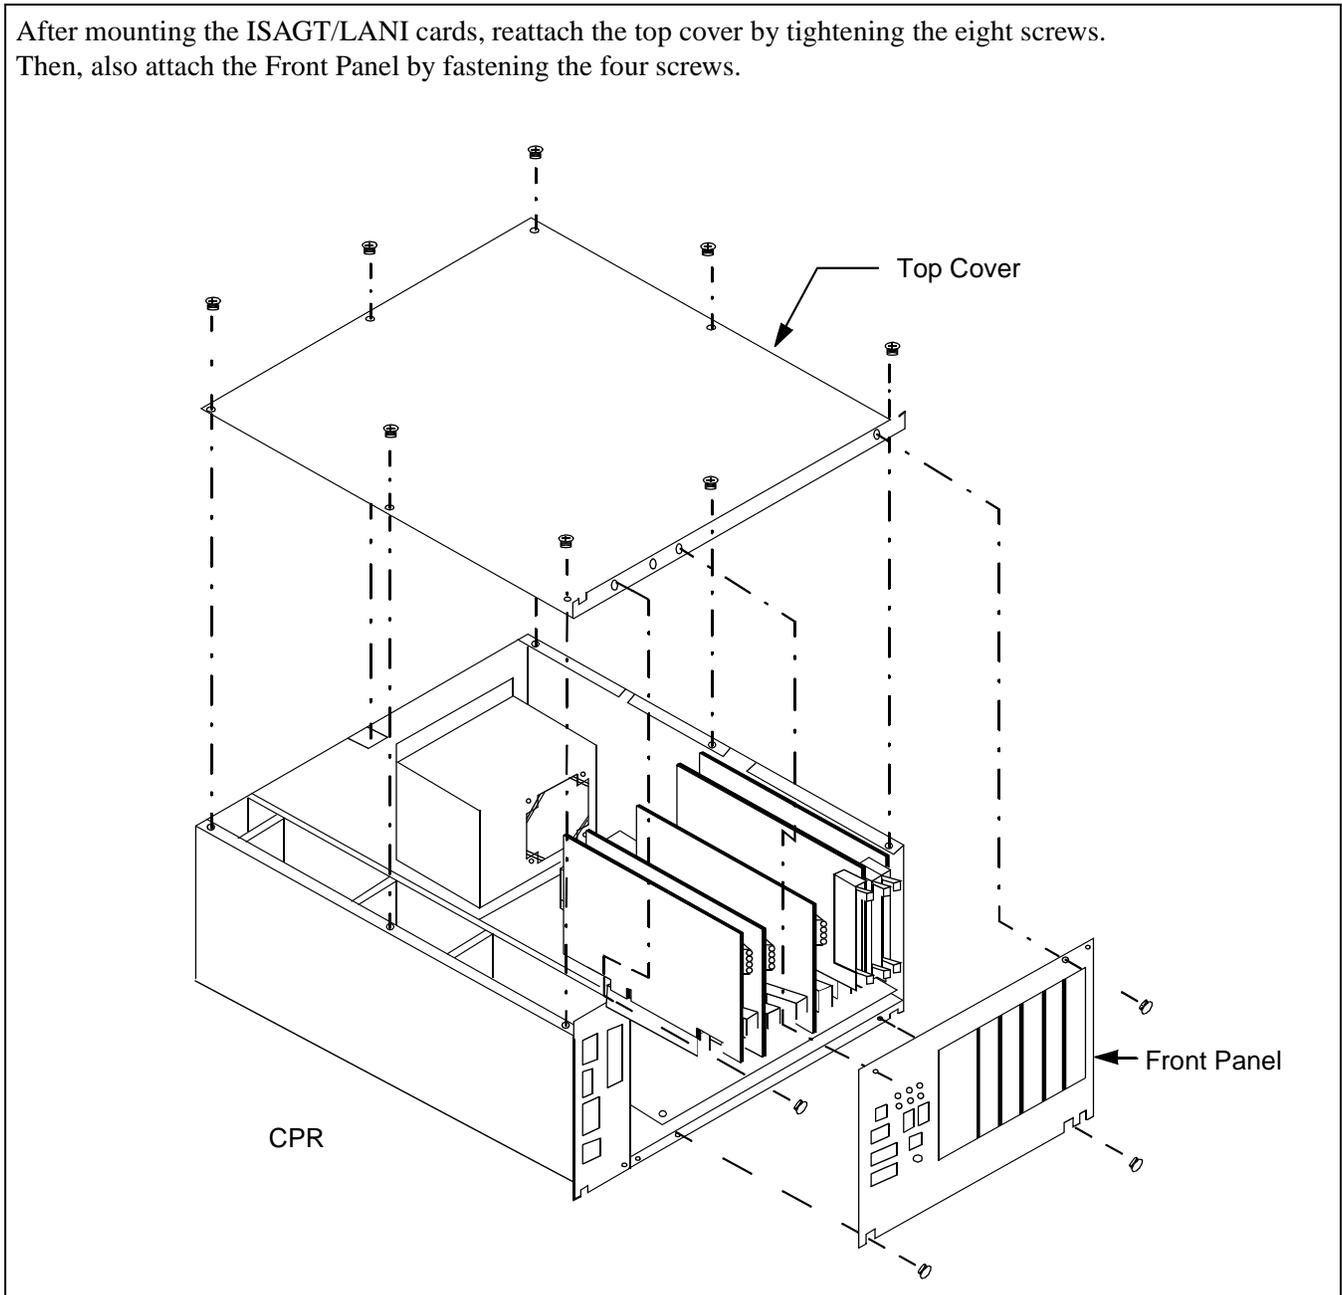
Reattaching CPR Top Cover and Front Panel
